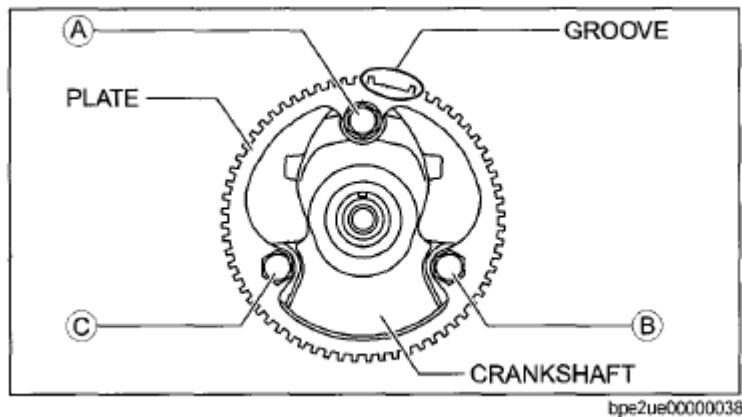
Locating Crankshaft Pulley Bolt And Crankshaft Sprockets
